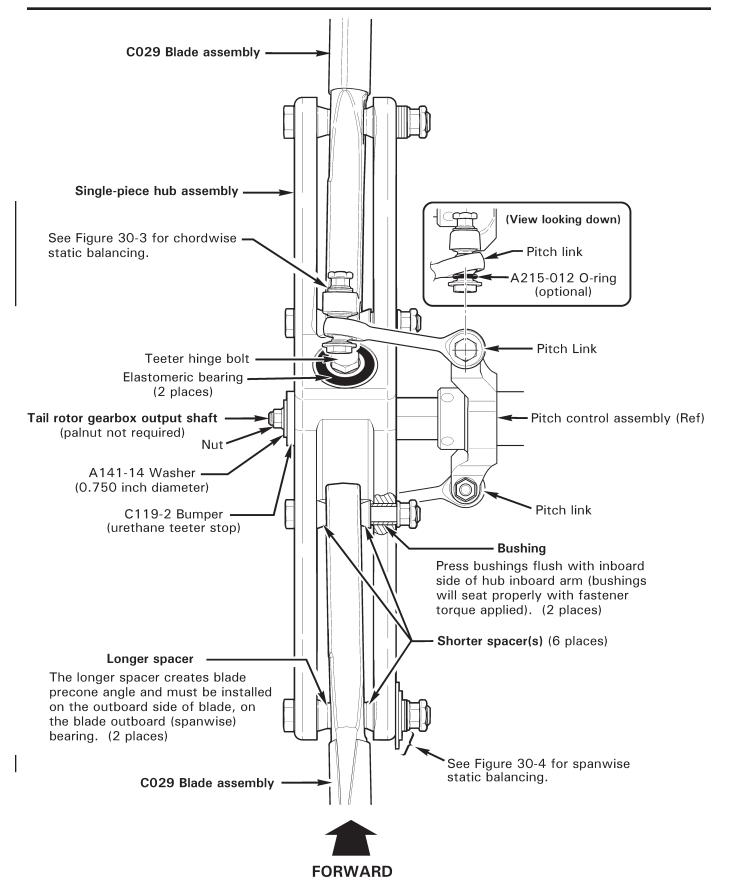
SINGLE-PIECE HUB TAIL ROTOR ASSEMBLY INSTALLATION
